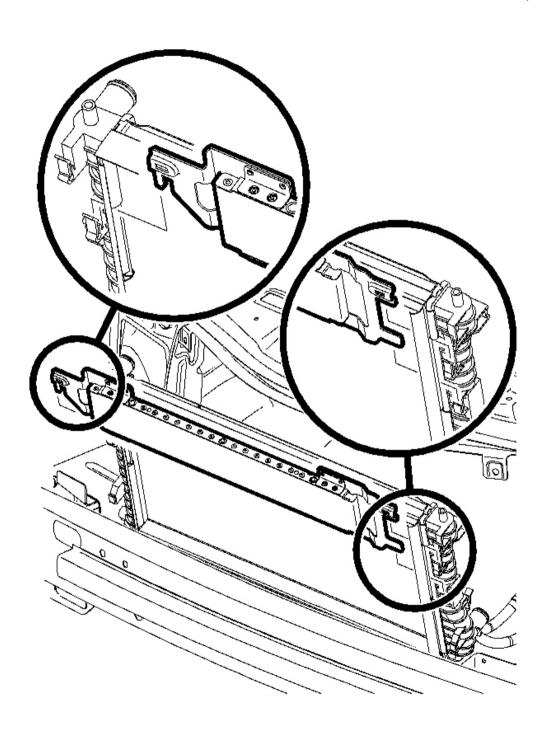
View Of Transmission Cooler Liners To The Vehicle Courtesy of GENERAL MOTORS CORP.
